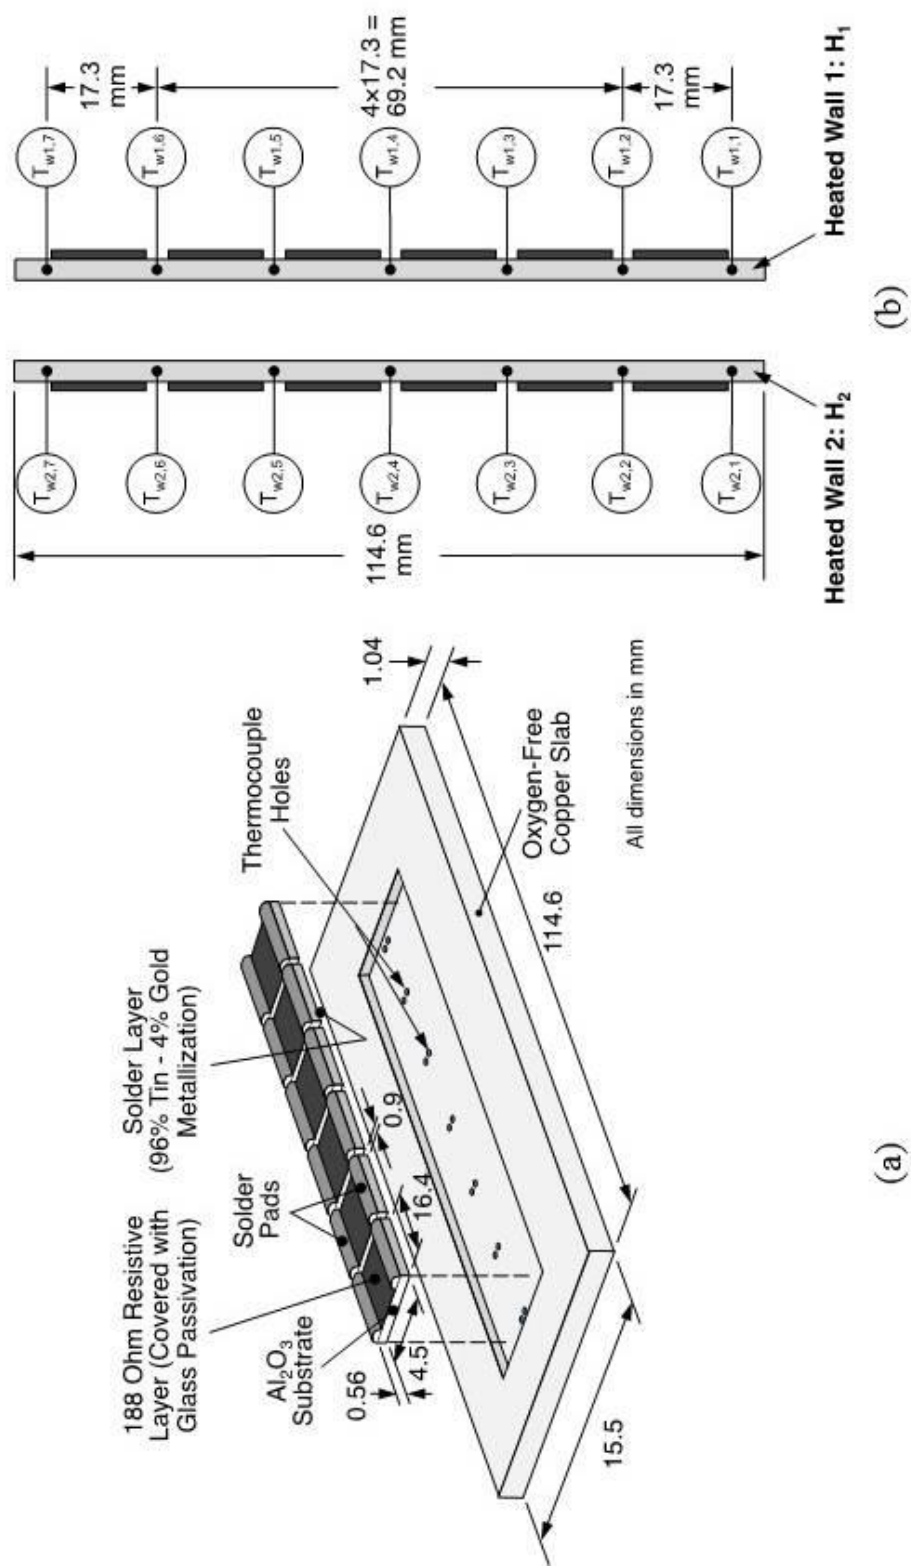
(a) Construction of heated wall and thick-film resistors. (b) Thermocouple layout in two heated walls.
